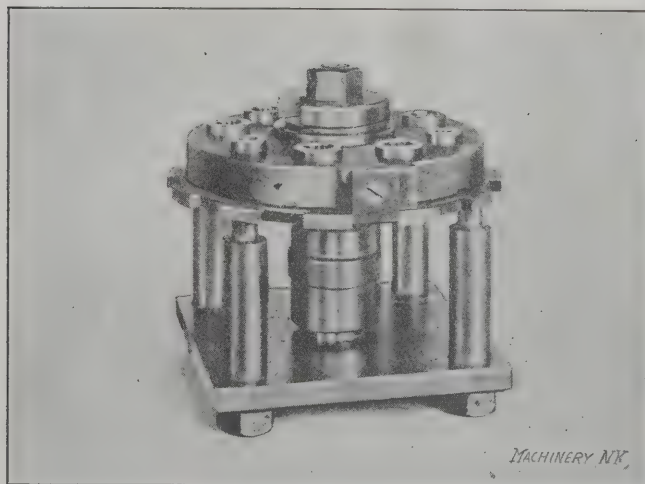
Jig for Drilling the Bolt and Pivot Holes in the Gear Case Covers. Another Jig for the Same Operation is shown at the Left of Fig. 5
